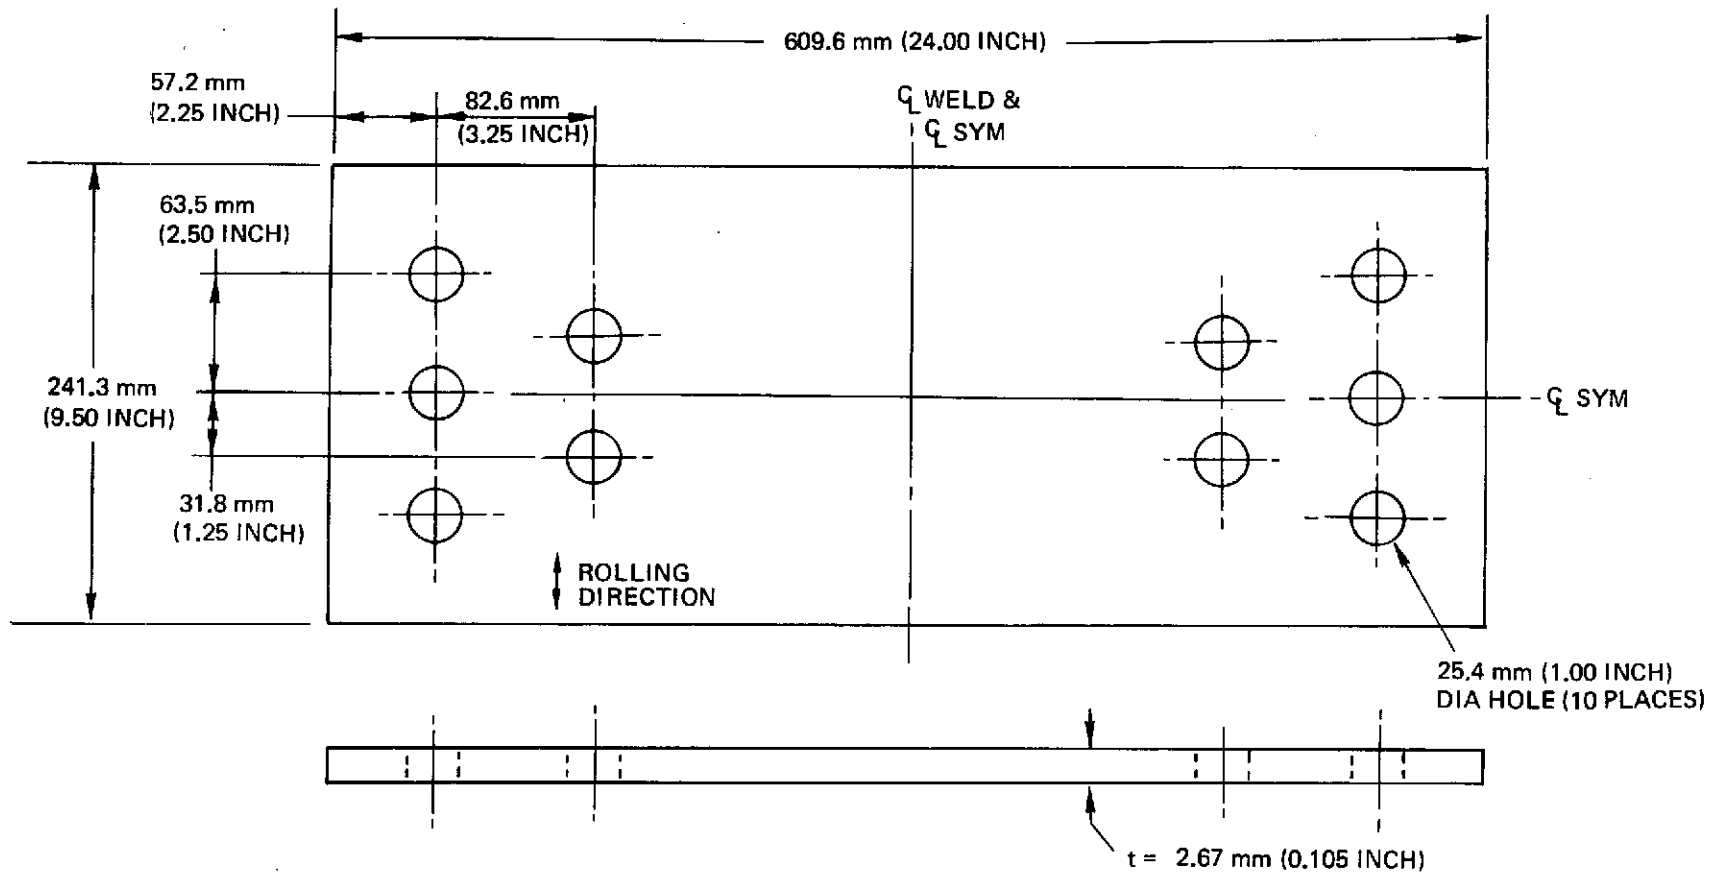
241.3 mm (9.50 INCH) WIDE 2219-T87 ALUMINUM ALLOY WELDMENT SPECIMEN
